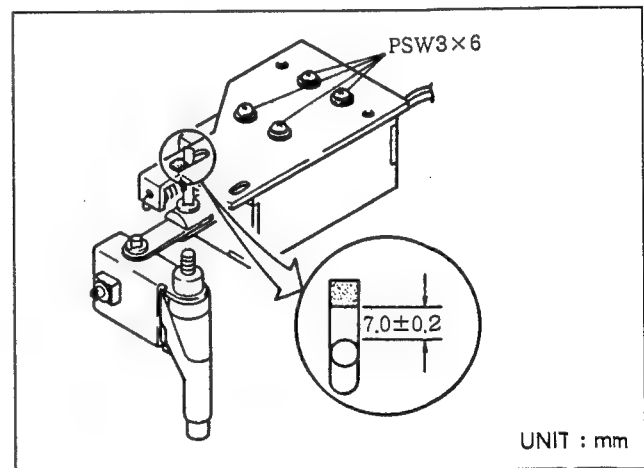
Pinch Roller Solenoid Position Adjustment
